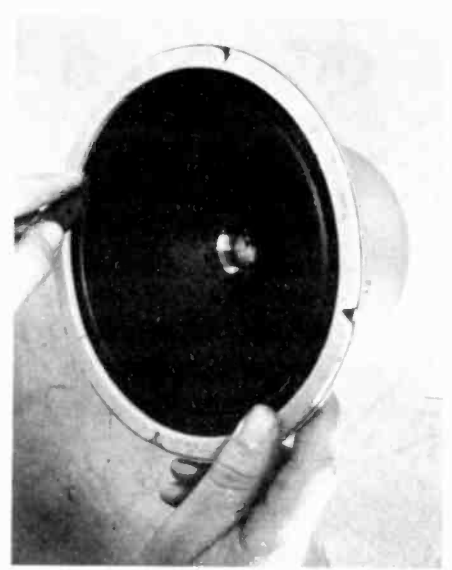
Slitting the outer edge of the cone to remove it from mechanical engagement with the frame.
